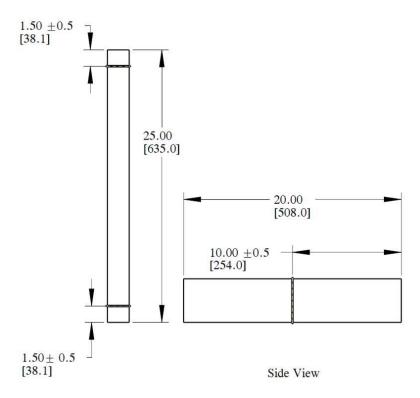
Side View of Restraint Rod Locations for Leather Covered Seat Test Samples
